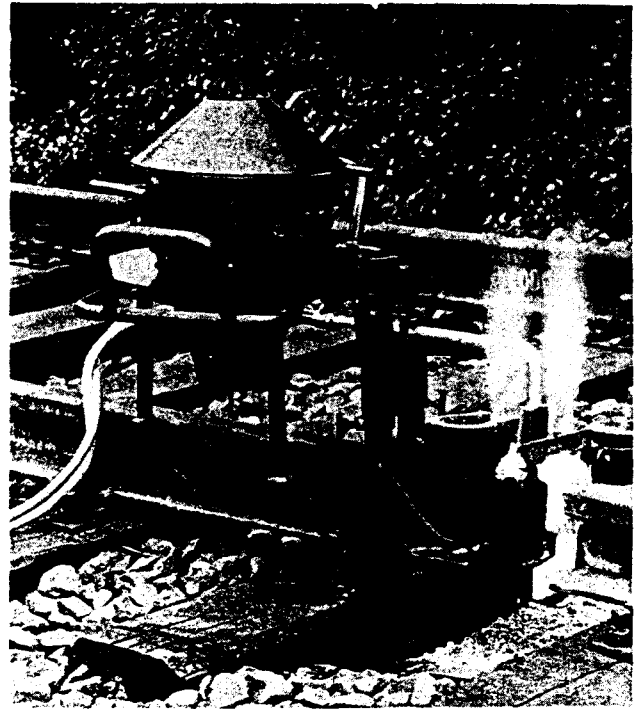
Preheating Rail Ends With a Gas Torch Prior to Thermit Welding
